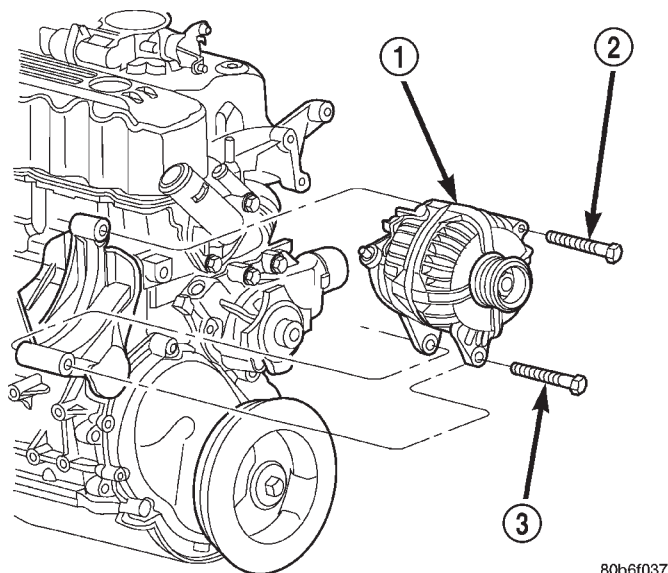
Remove/Install Generator—4.0L 6-Cylinder Engine
